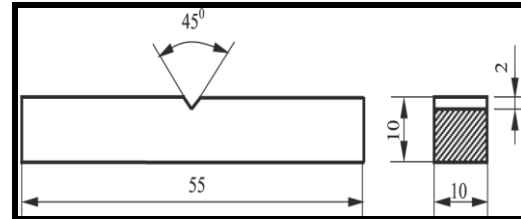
Dimensions of a standard Charpy Impact test specimen.
